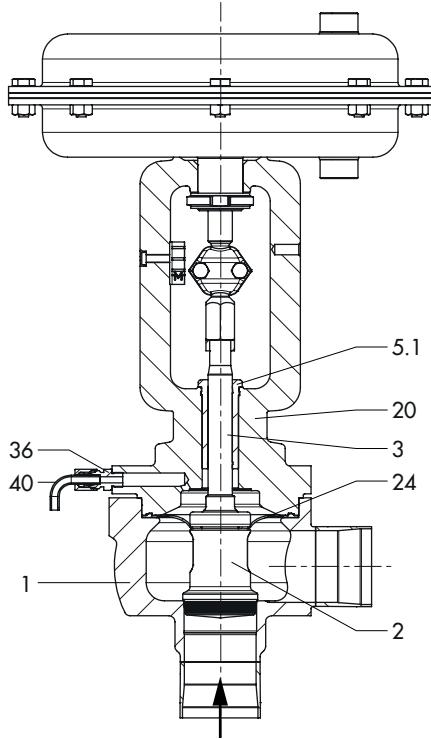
Type 3349 Valve with Type 3271 Pneumatic Actuator
